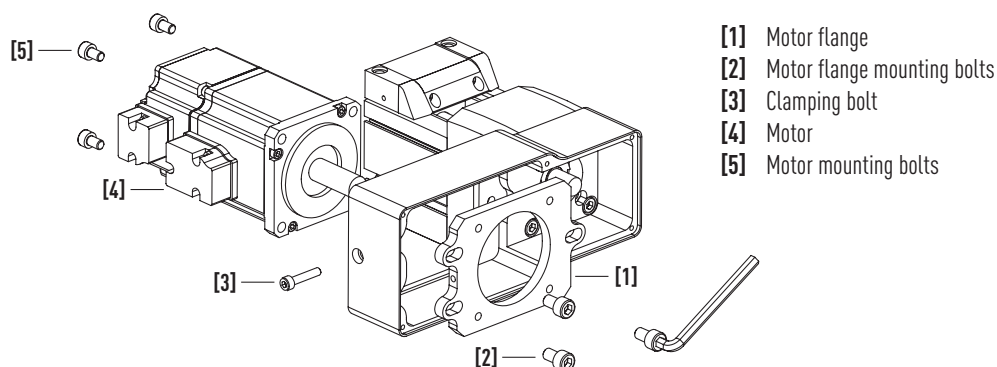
Mounting the motor flange, clamping bolt, and motor
